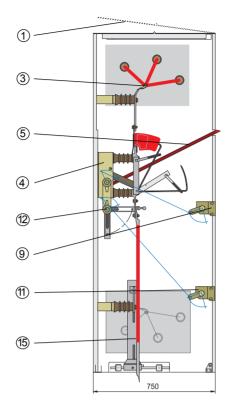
12 kV Cable panel (bus sectionalizer panel) with switch-disconnector H 22 EK/EA
